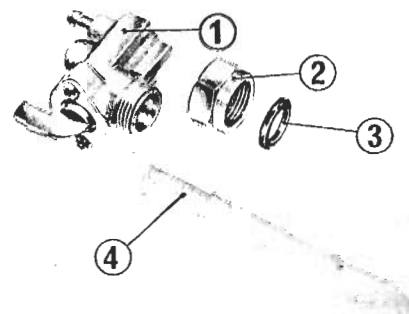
(1) Fuel cock (2) Fixing nut (3) Gasket (4) Fuel filter
